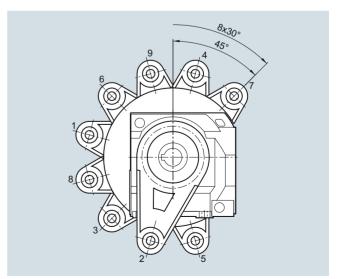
/12 Helical worm gearboxes CAD., Figure 2, sizes 39 to 89
